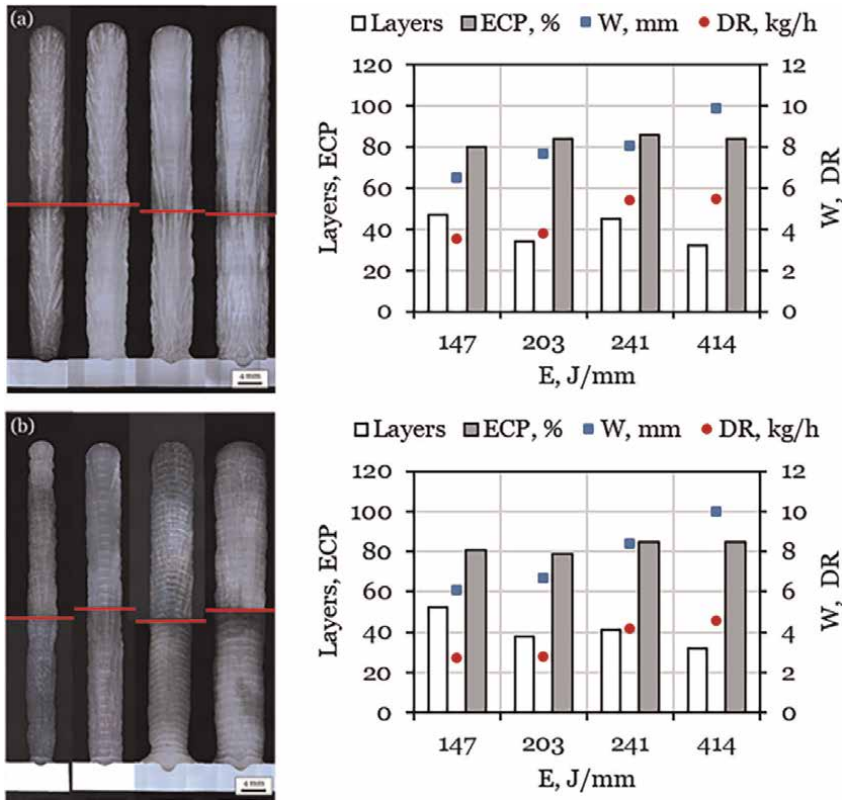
Cross sections (Y-Z plane) of S Ni 7718 walls: (a) standard (b) AM welded with ArHeNC.
